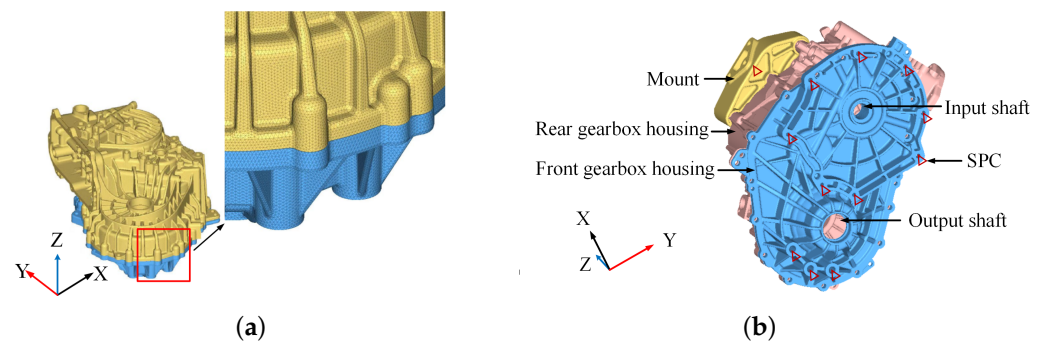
(a) Local mesh of finite element model. (b) Finite element model of gearbox housing.
